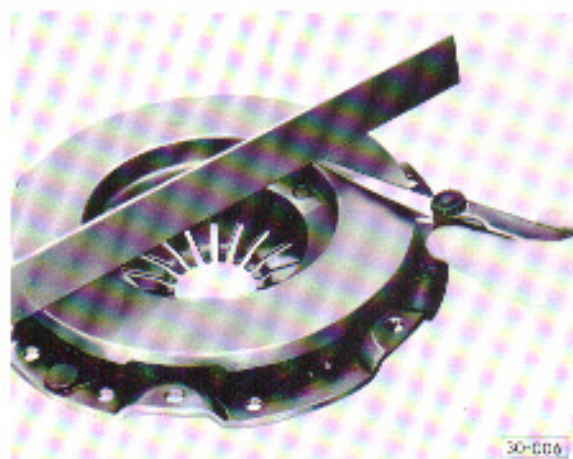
Checking the pressure plate surface for cracks, signs of burning and wear
